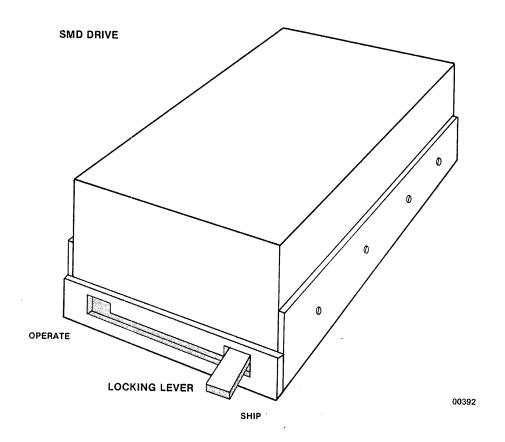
SMD Mounting Bracket with Head Locking Actuators
